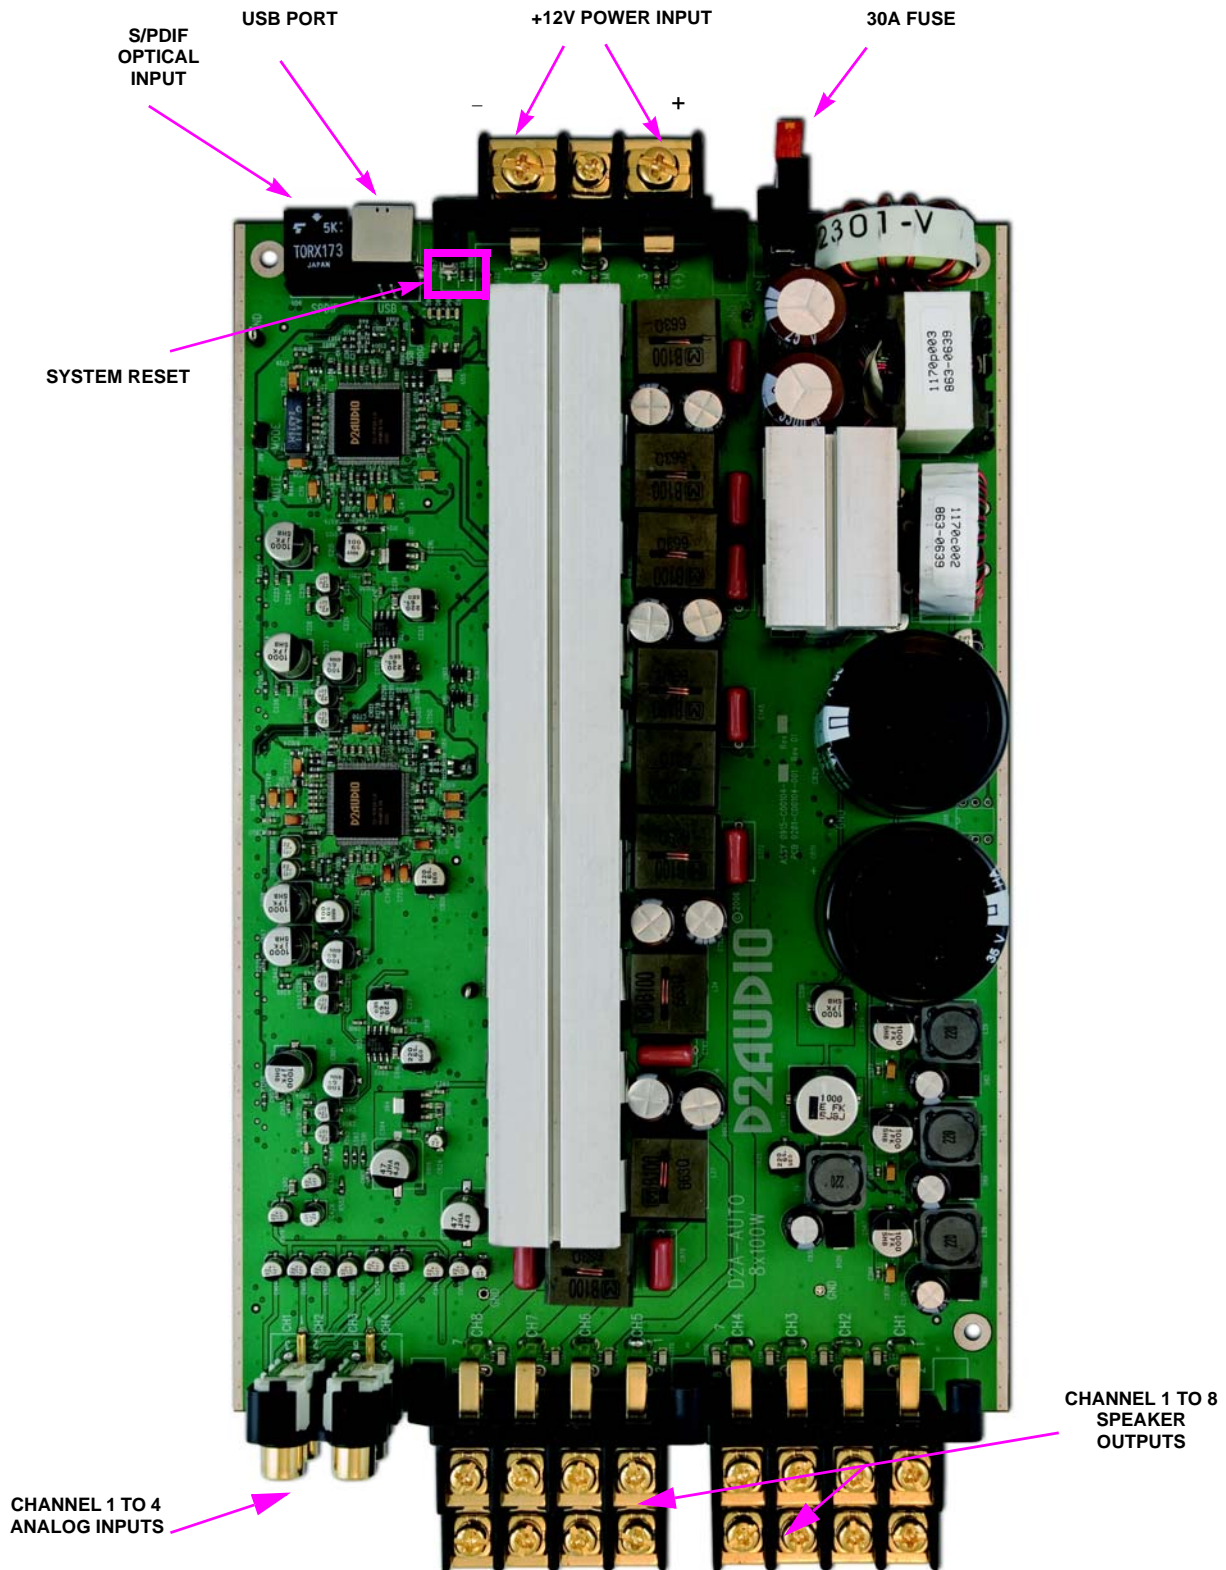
VA100-8 BOARD LAYOUT AND CONNECTION PLACEMENTS
